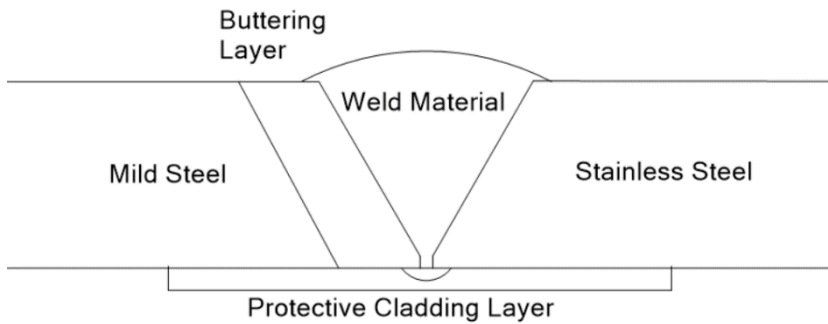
Example of a complex butt weld with dissimilar metals
